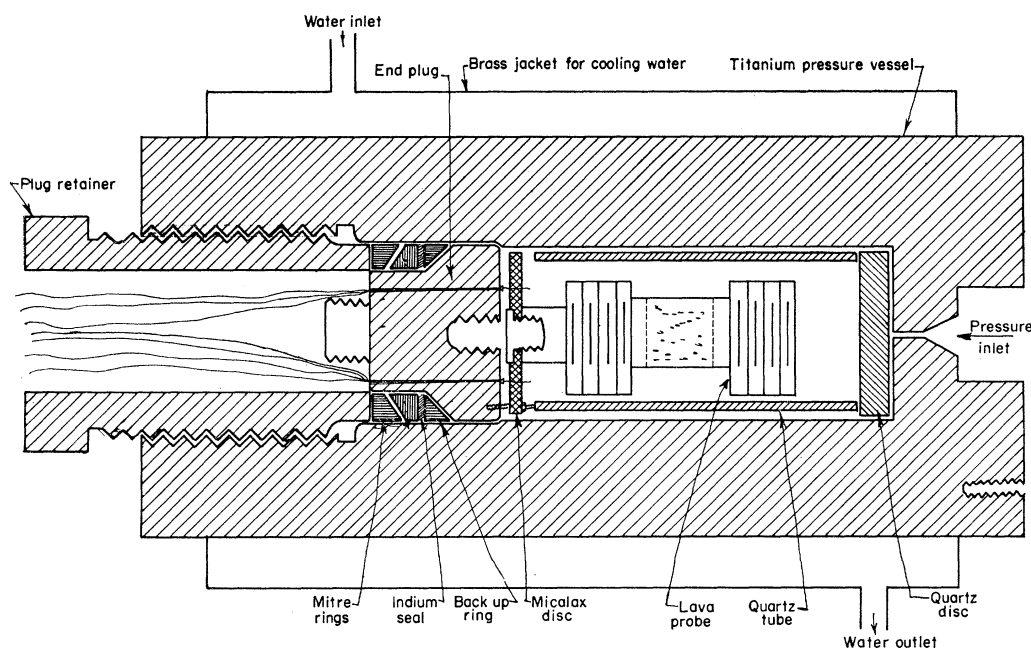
Cross section of the pressure vessel with the probe assembly.
